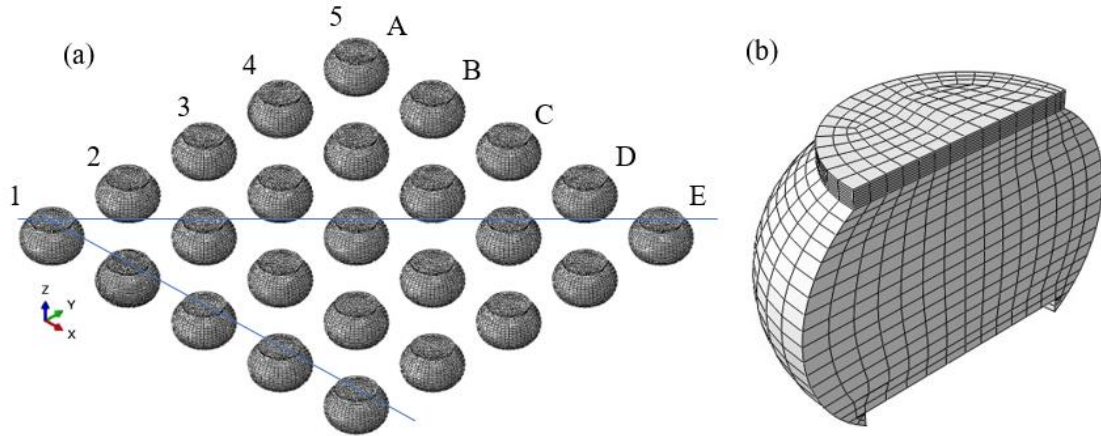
The one-fourth FE model of BGA assembly including component dimensions. The inset figure displays the cut-out geometry of the solder joint with SMD at the package side and NSMD at the board side
